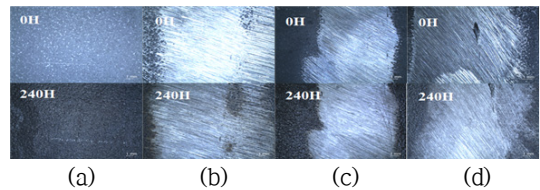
Appearance of 4 kinds of specimen during 240 hour in alkaline solution. (a) As-received, (b) 250A weld, (c) 300A weld, (d) 350A weld
